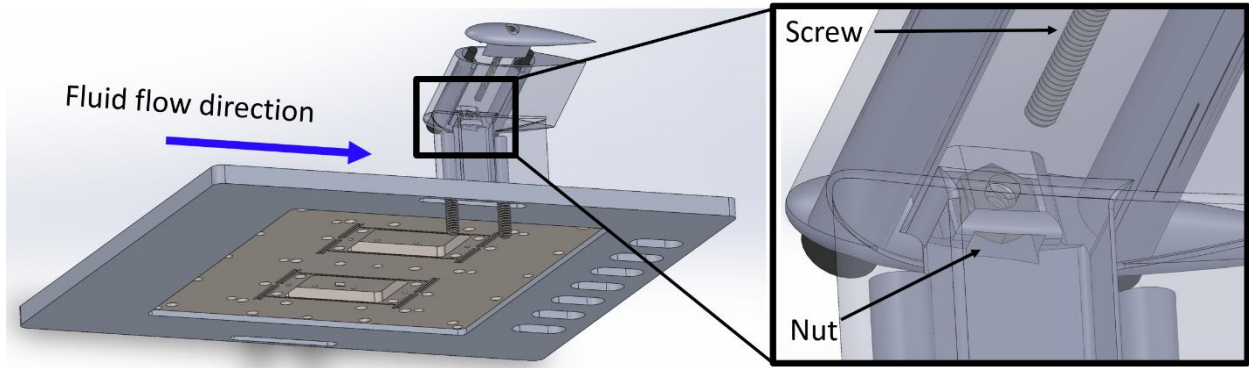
Behind and bottom view of new housing showing screw attachment of lid onto the body frame.
